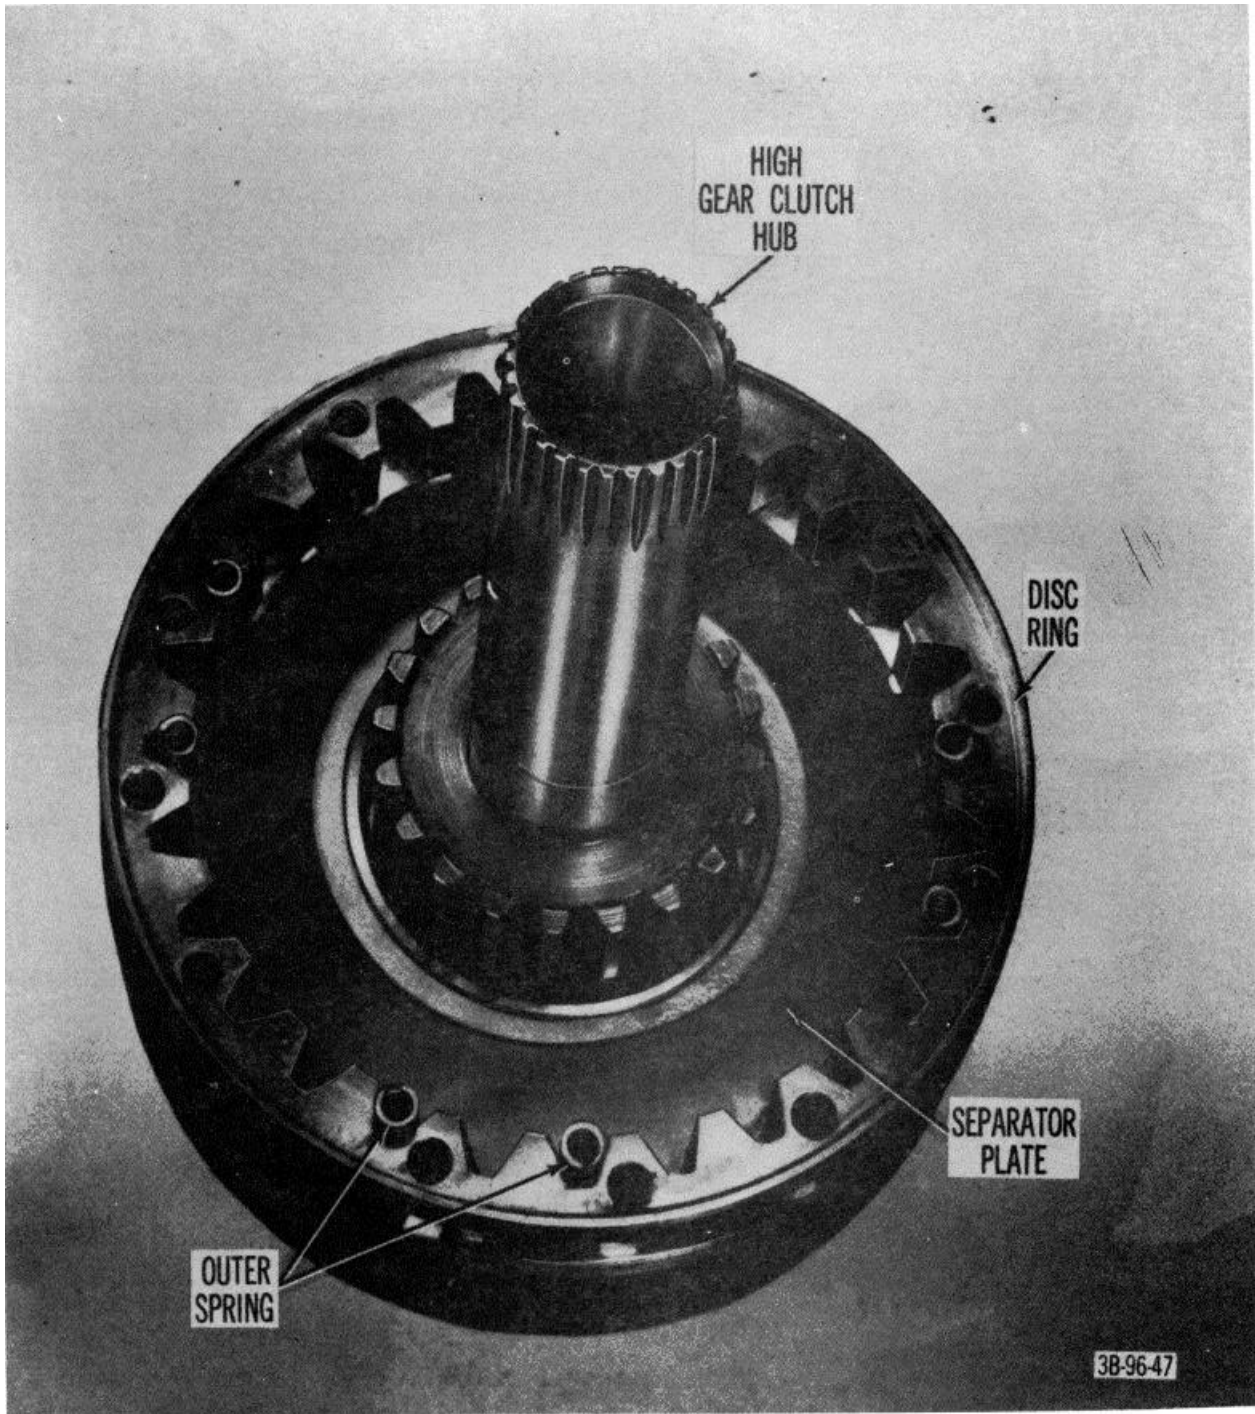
Separator plate, high gear clutch hub, and disk ring installed on rear end housing.
